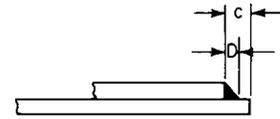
Minimum landing for a fillet weld.
